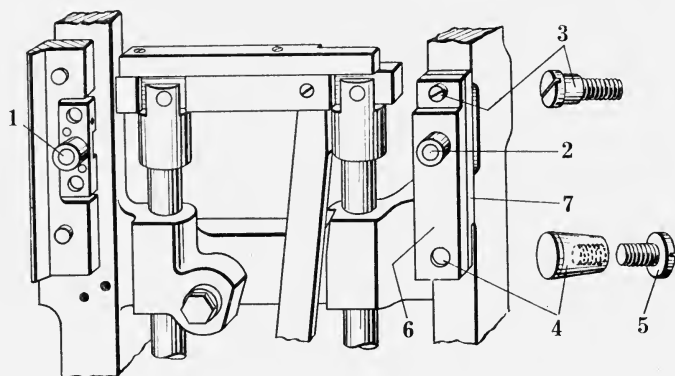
Vise Mold Disk Locking Stud Blocks. (Rear inside view.) Showing the right and left-hand mold disk locking stud blocks which hold the mold disk rigidly in place while a matrix line is being justified previous to the casting of a slug, and during ejection of the slug through the trimming knives. The right-hand block 1 is fixed as to position. The left-hand block 2 is slightly movable and is called the floating stud block. The two plates are hinged at the bottom by the cone or hinge block 4 and the screw 5. The top of the back plate 6 is slightly movable sidewise and its movement is limited by the shoulder screw 3. The front plate 7 is doweled to the vise frame and is immovable.
